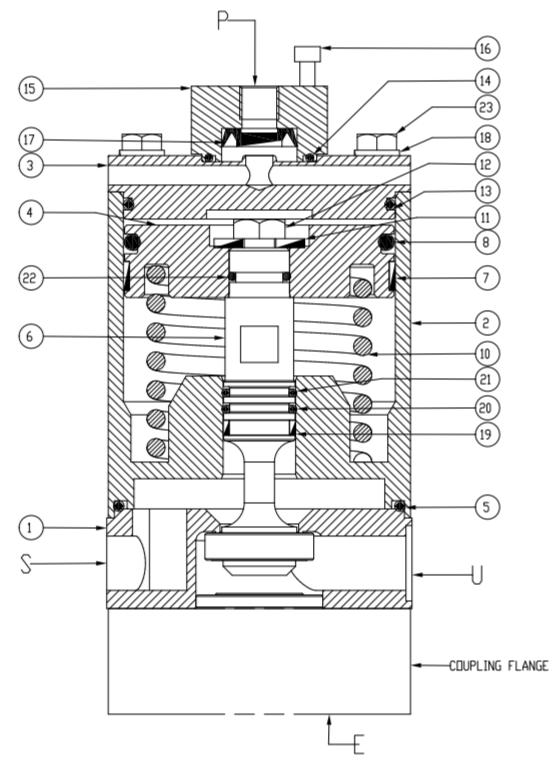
CO 3 way pneumatic valve size 1"  $\frac{1}{2}$ : aluminum machining
